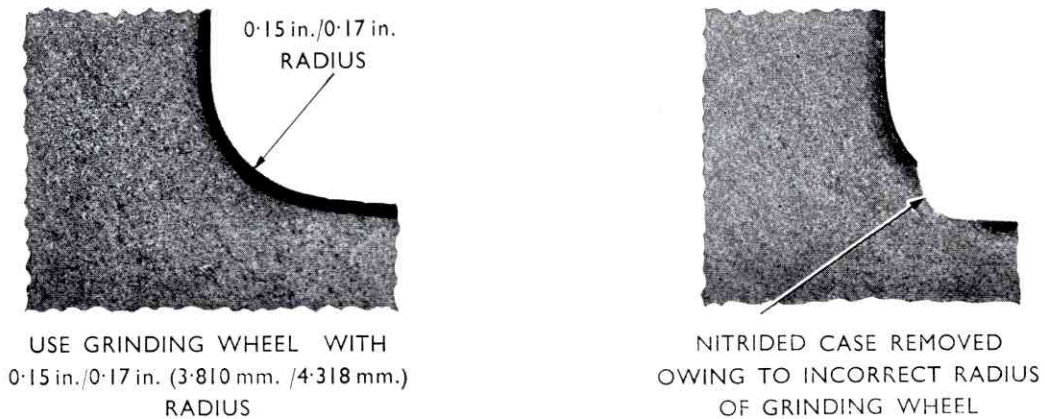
SECTIONS OF JOURNAL-TO-WEB FILLETS
